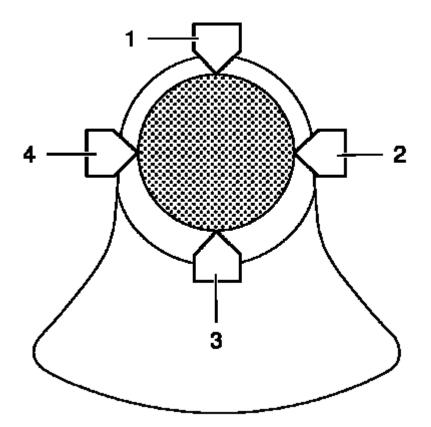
Measuring Connecting Rod Bearing Diameters Courtesy of GENERAL MOTORS COMPANY
